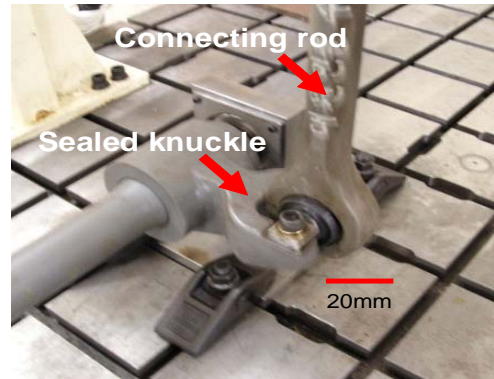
Accelerated wear-fatigue life testing of sealed knuckle component of KTX train by hydraulic fatigue test machine
